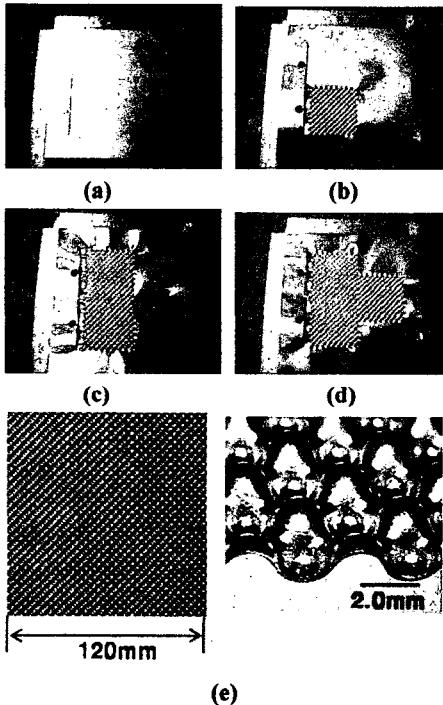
Piecewise sectional forming process; a) Initial specimen b) 1st forming c) 2nd forming d) 3rd forming e) Inner dimpled shell structure
